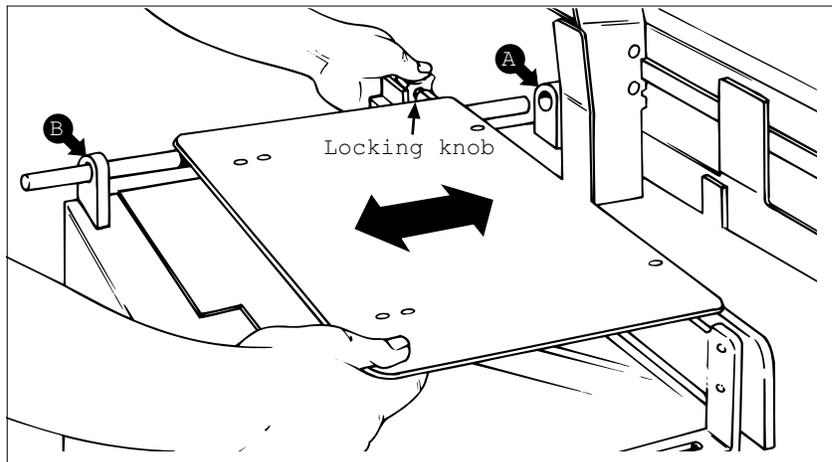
Back Jogging Plate/Back Hopper Guide Removal
